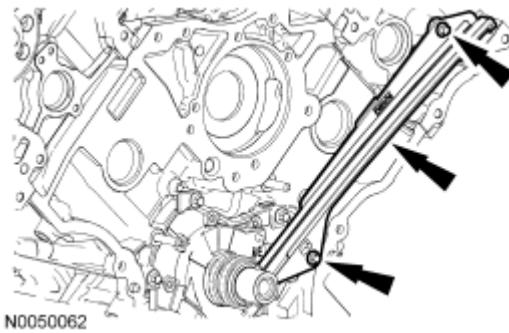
Locating LH Primary Timing Chain Guide Bolts
